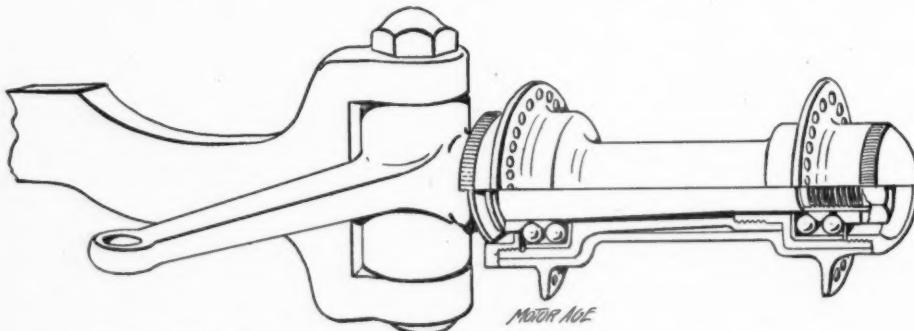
A BALL-BEARING HUB FOR WIRE WHEEL WITH STUB AXLE, KNUCKLE JOINT AND STEERING LEVER.
